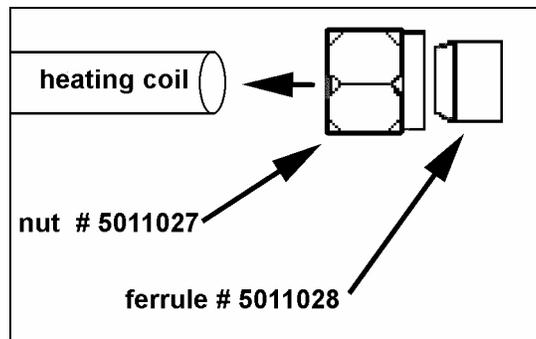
INSTALLATION OF FITTING ON HEATING COIL
